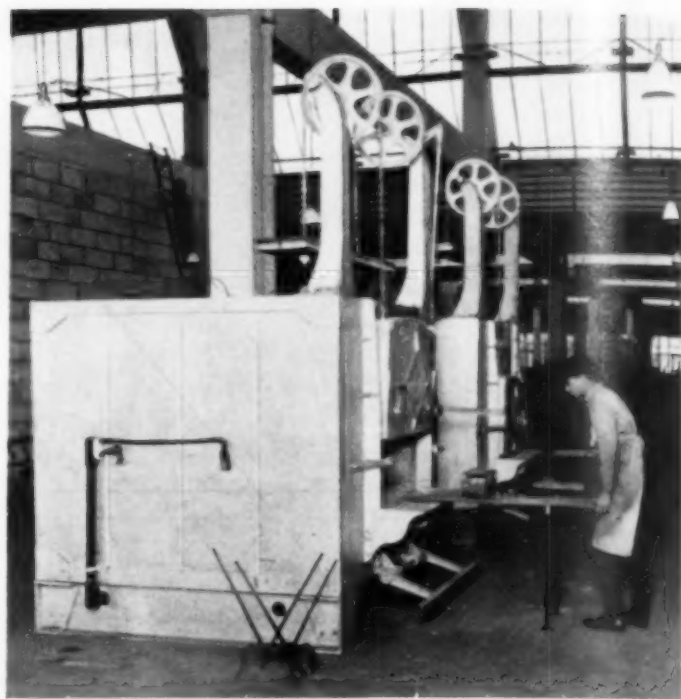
Furnaces Similar to Batch Type Carburizers Used in 1922 for the Sintering of Porous Bearings
